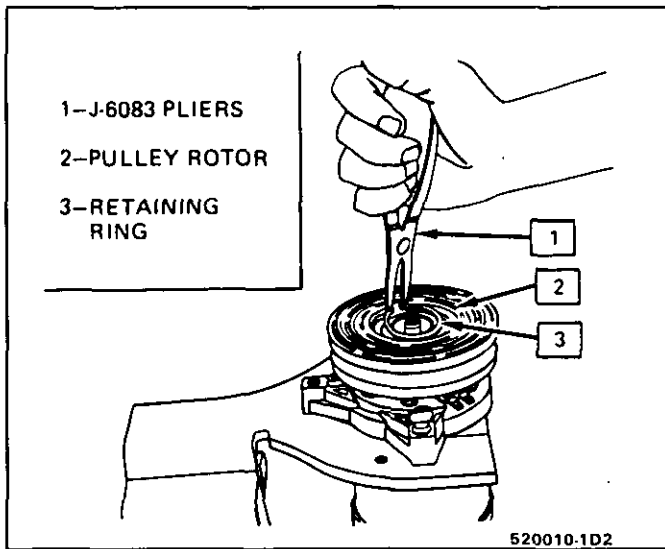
Removing Pulley Rotor & Bearing Assembly Retaining Ring
